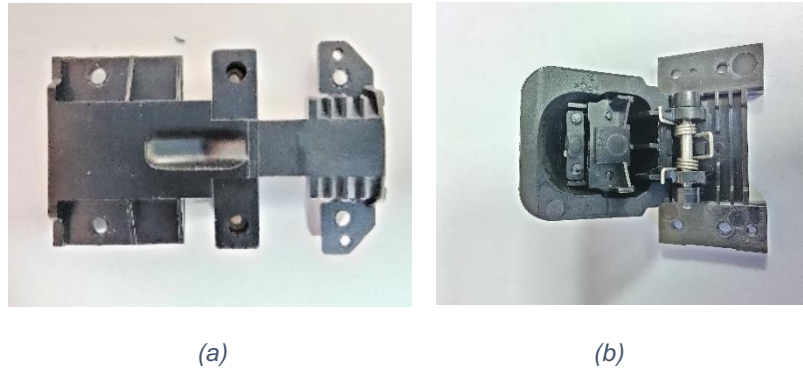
(a) Wrist Strap Holder (b) Trigger button sub-assembly
